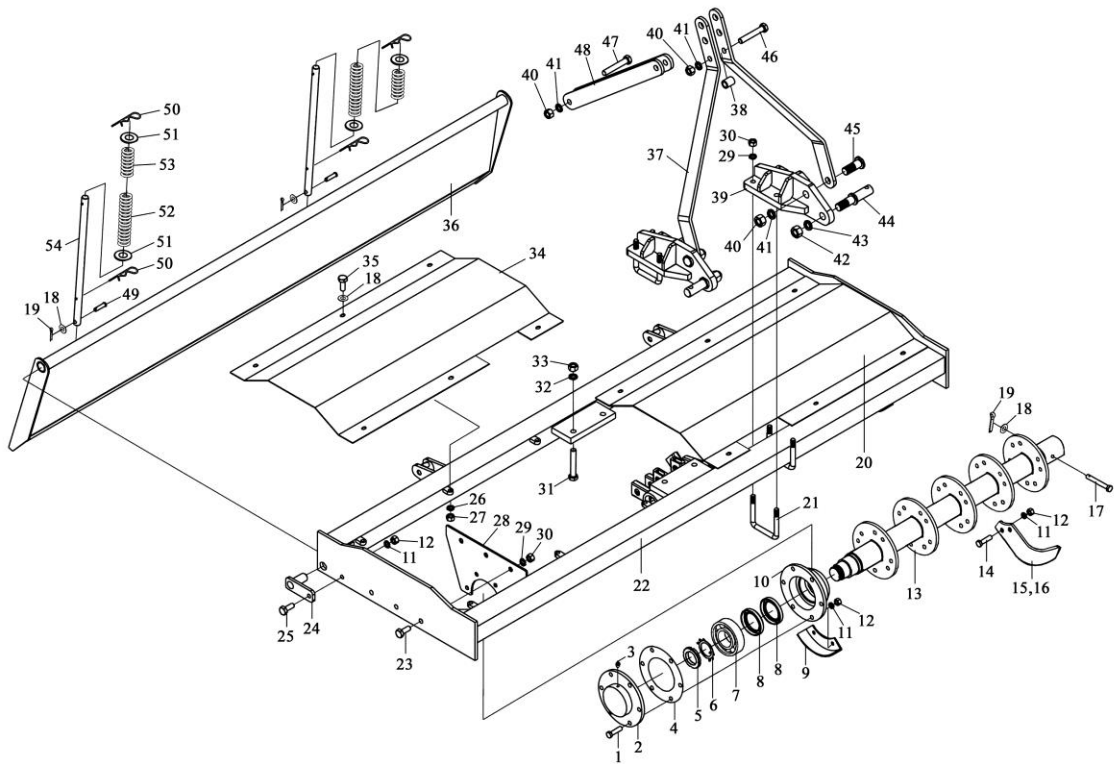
Main Beam, Blade Shaft & Suspension Assembly
